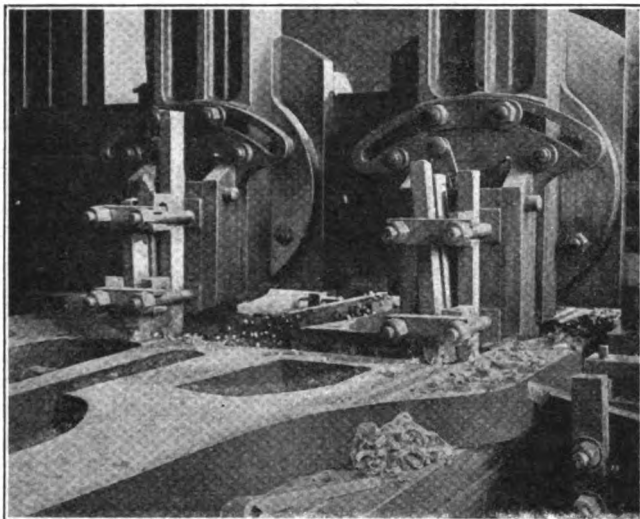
USING MULTIPLE TOOLS ON PLANER
